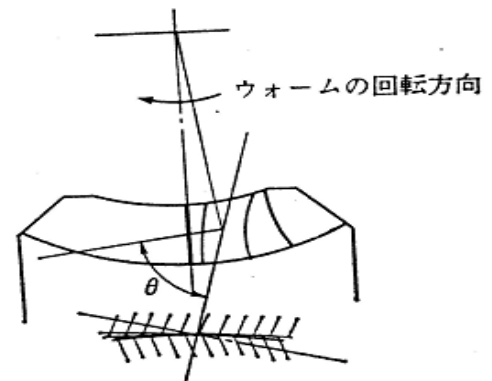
Contact mechanism of mating teeth of Hindley Hourglass Worm gear
